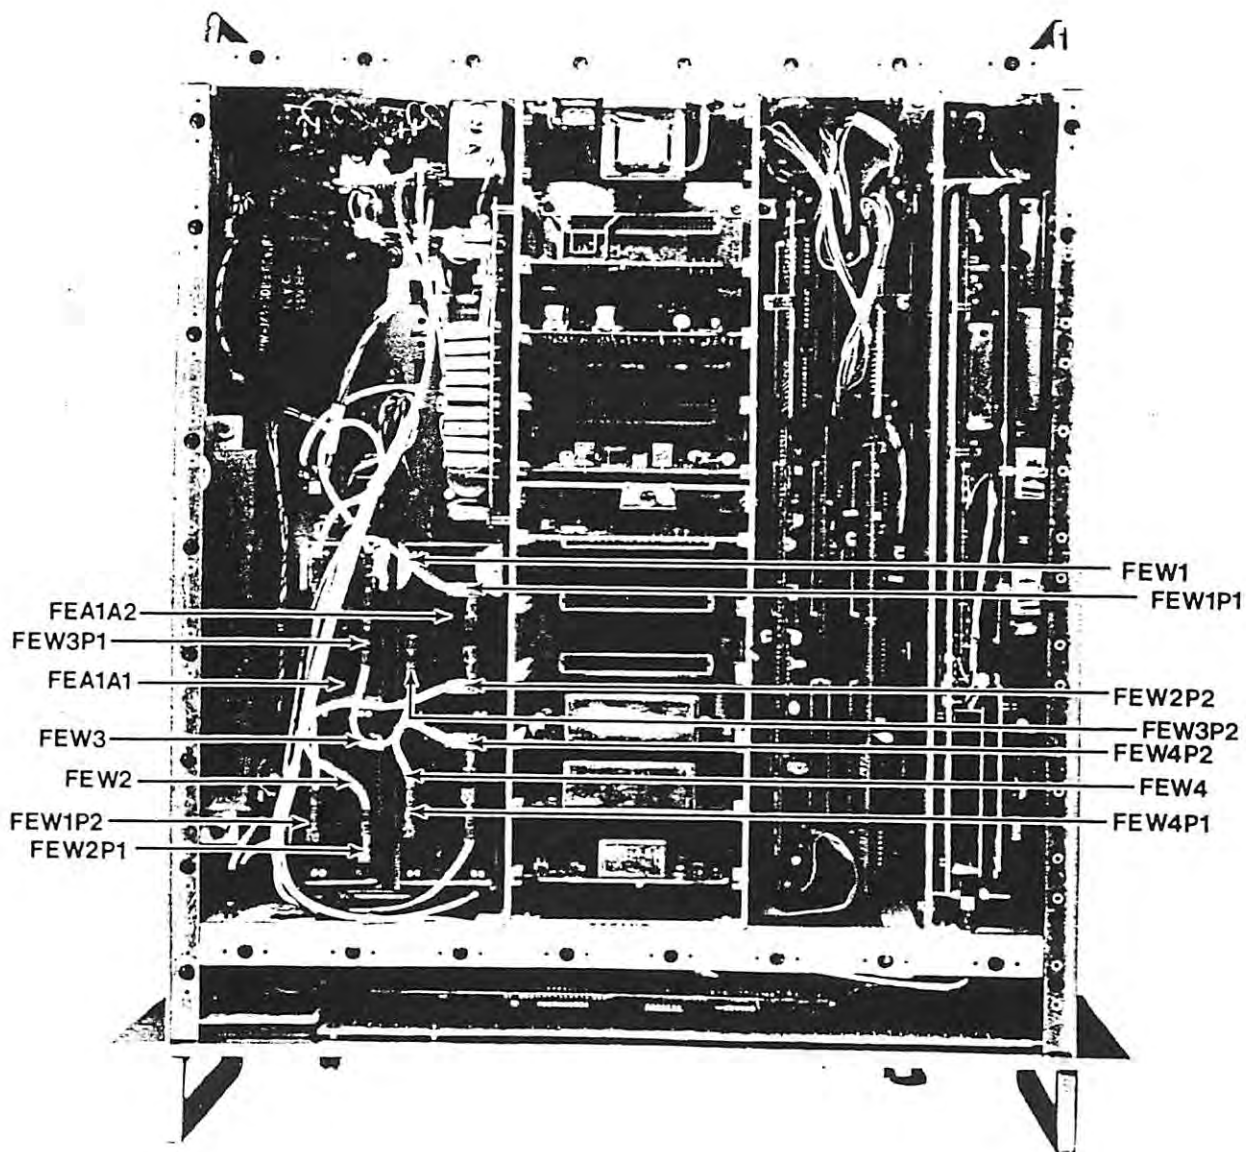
WJ-8718-19/FE HF Receiver, Top View, Location of Components(Sheet 2)
